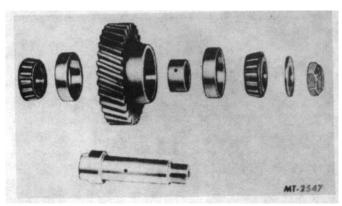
Idler Gear Components (RA-341 Shown) FORWARD REAR AND REAR REAR AXLES Disassemble Diff Carrier Assembly
